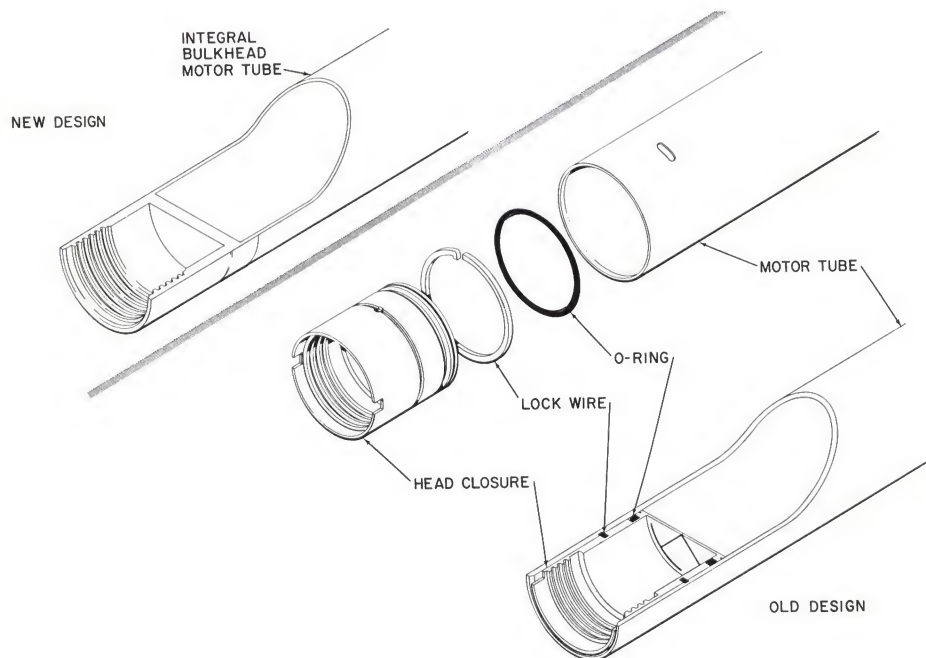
Components in Forward End of 2.75-Inch FFAR Motor, Showing Old and New Designs.
